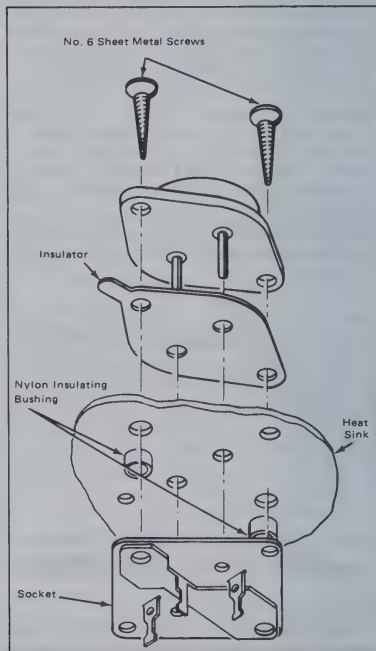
Mounting Details for Flat-Base Mounted
